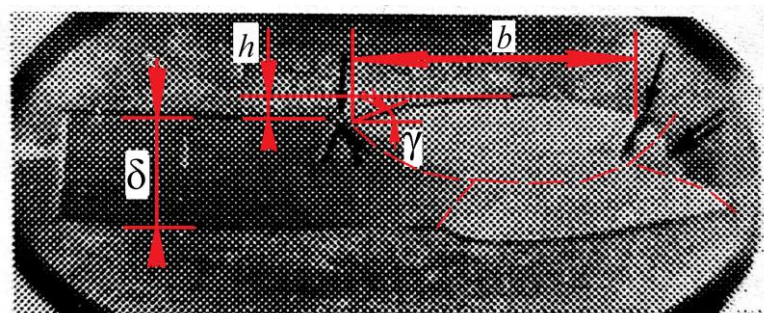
Destruction in the pipe welded joint from the stress concentration in the fusion zone. Steel 14HGS. Single arrow shows fatigue cracks; double arrow — pipe burst edge; strokes — weld outlines. Here, b — weld width; h — weld height; δ — weldment thickness; γ — angle of transition from base metal to weld [9]
